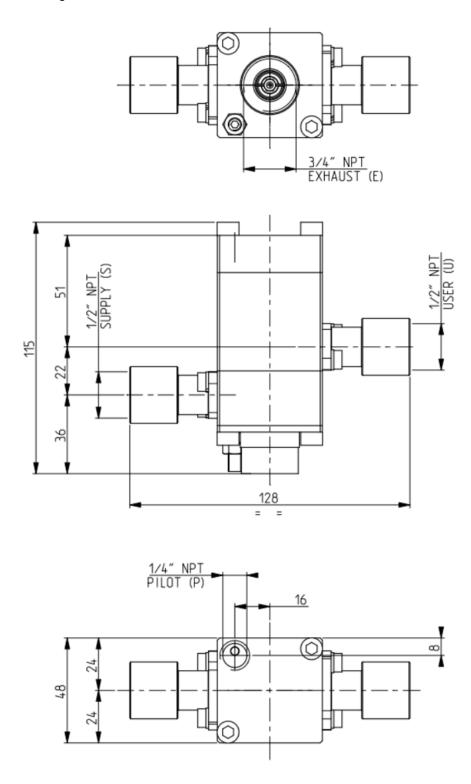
Dimensional drawing BR-08SSH00 / BR-08SSS00 / BR-08SSL00
